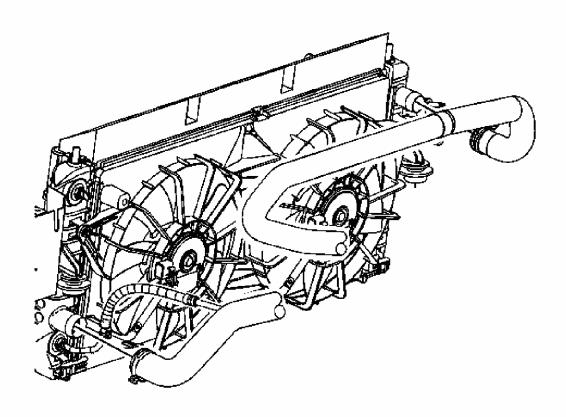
Identifying Radiator Outlet Hose Courtesy of GENERAL MOTORS CORP.
